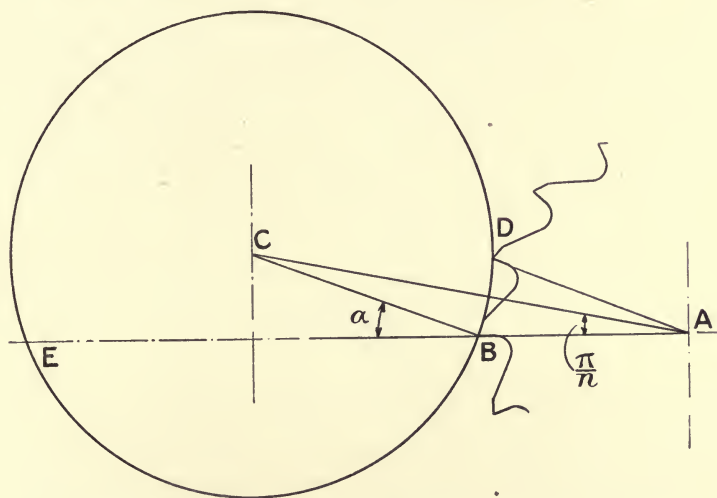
MAXIMUM SIZE OF DISC WHEEL—PARALLEL CUTTERS
